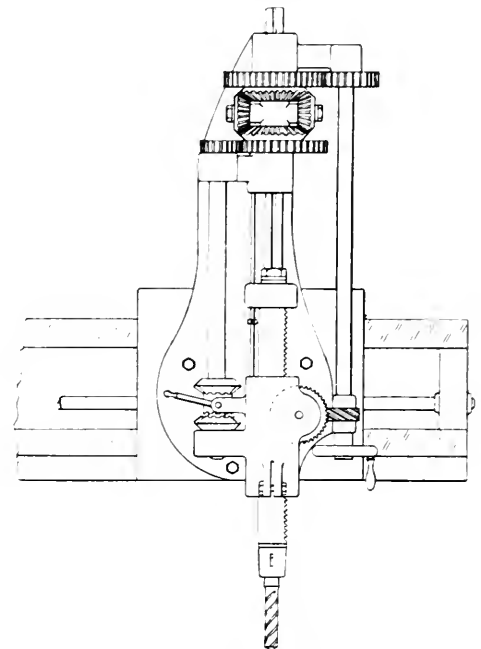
DRILL WITH AUTOMATIC FEED GOVERNED BY DRIVING TORQUE
